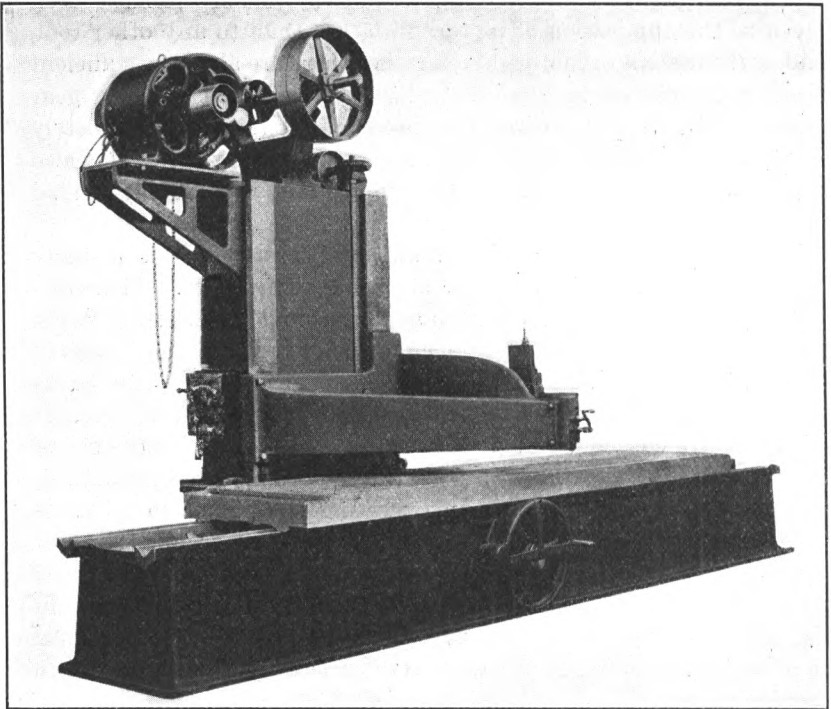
ARMATURE-SHIFTING MOTOR APPLIED TO A PLANER
